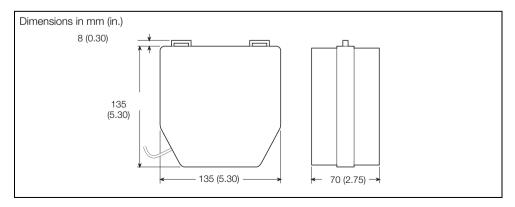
AquaMaster 3 Battery Pack Dimensions
